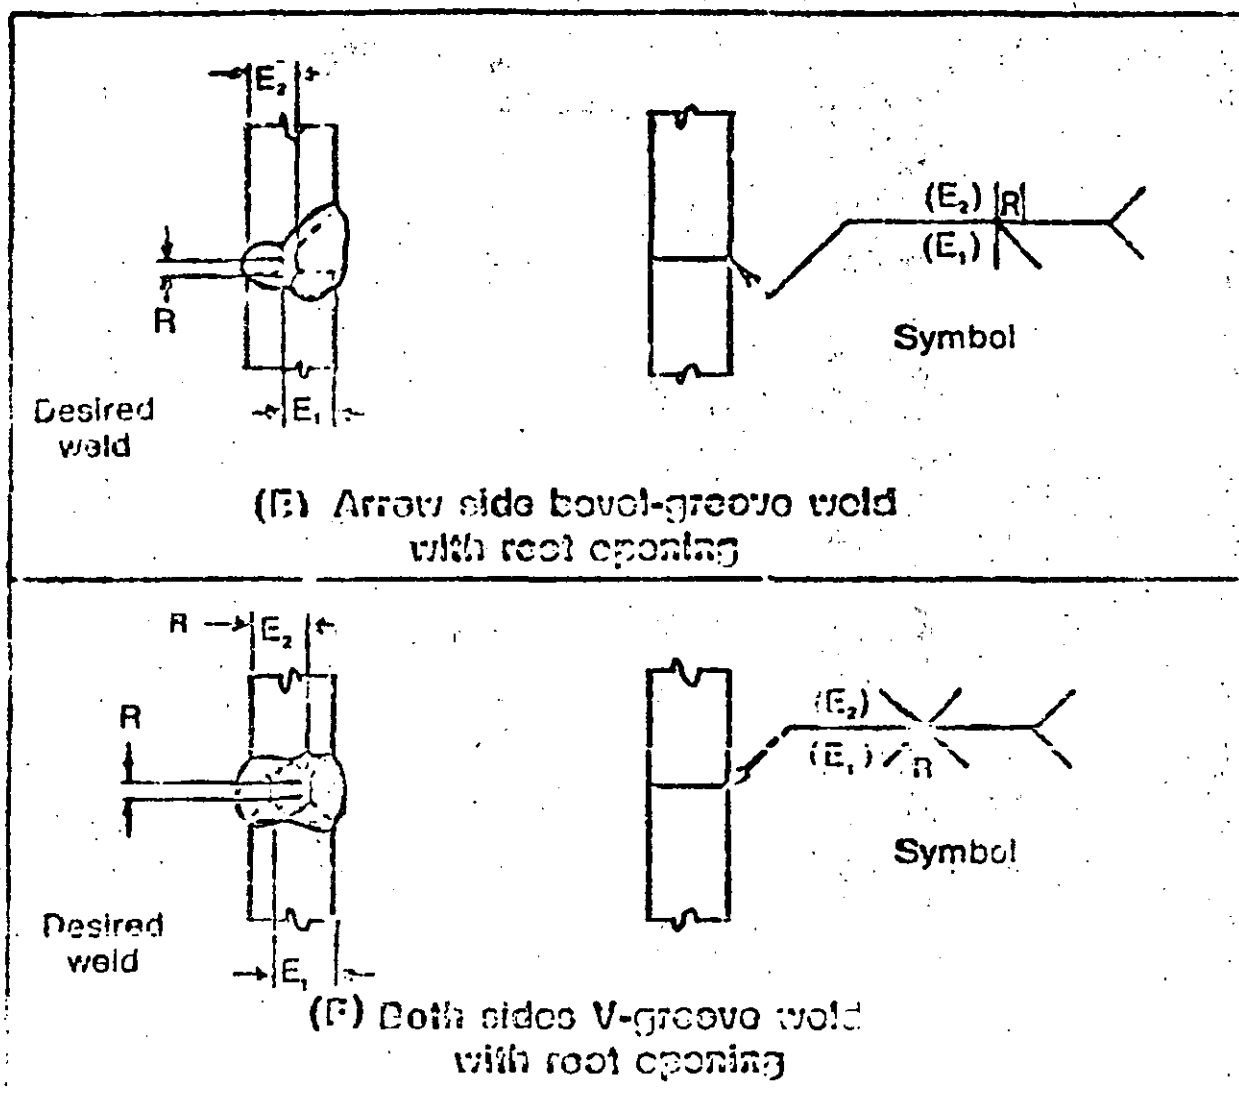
(cont.)— Designation of effective throat of groove welds with specified joint preparation.
